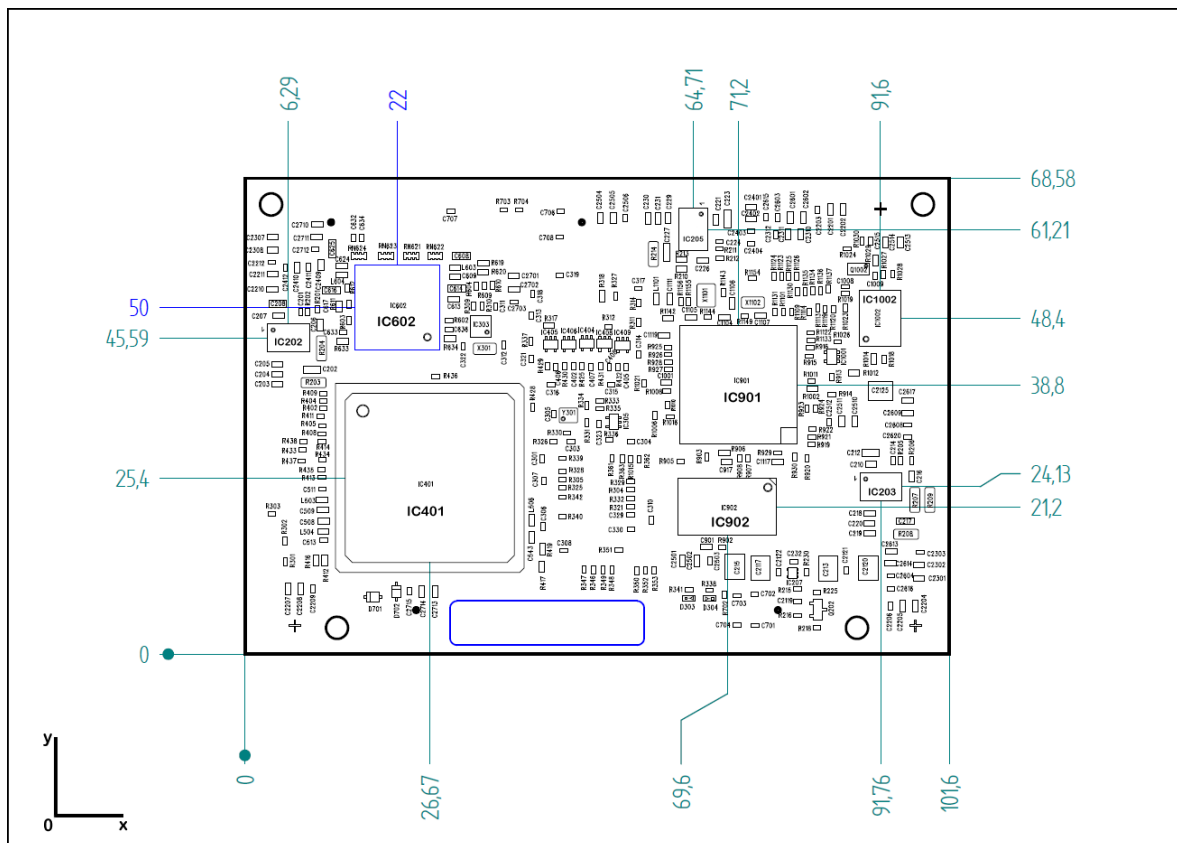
Positions of ICs to be cooled on EESX-Module TOP VIEW
